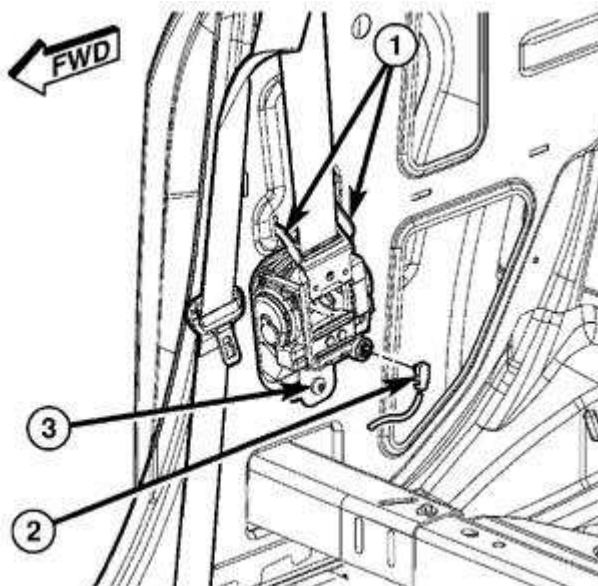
Identifying Indexing Tabs, Squib Connector & Retaining Bolt
